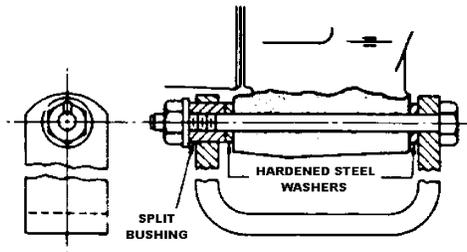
TYPICAL INSTALLATION OF SPLIT BUSHING IN BRACKET FOR SPOOL MOUNTING
